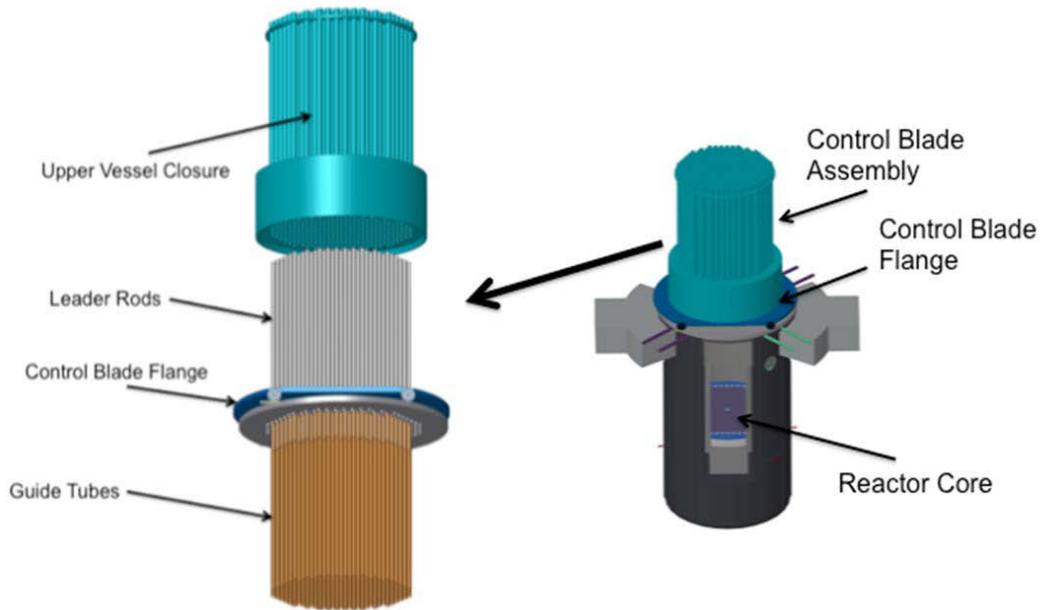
AHTR upper plenum, guide tubes, and the upper vessel closure. (Varma, et al., 2012)
